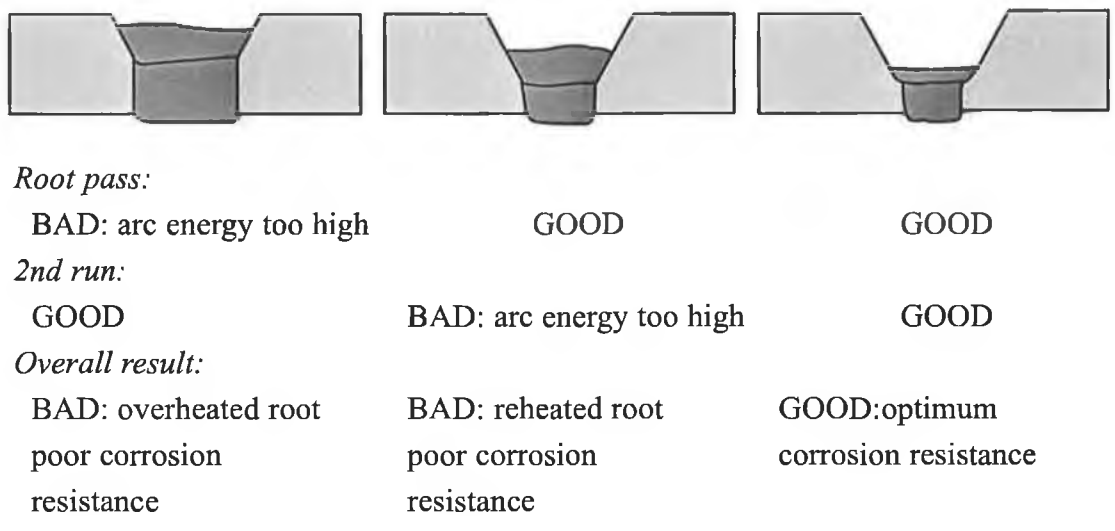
Variations in welding GTAW root and second pass; COLD PASS technique
